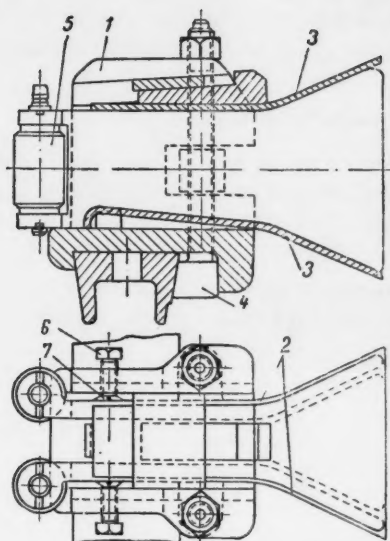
Entry roller assembly. 1) Assembly; 2) guiding edges; 3) shaped plates; 4) bolt-pivot; 5) rollers; 6) adjustment bolts; 7) plate springs.
